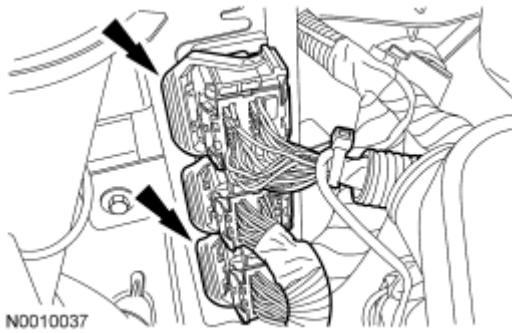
Identifying Upper & Lower Powertrain Control Module (PCM) Electrical Connectors
